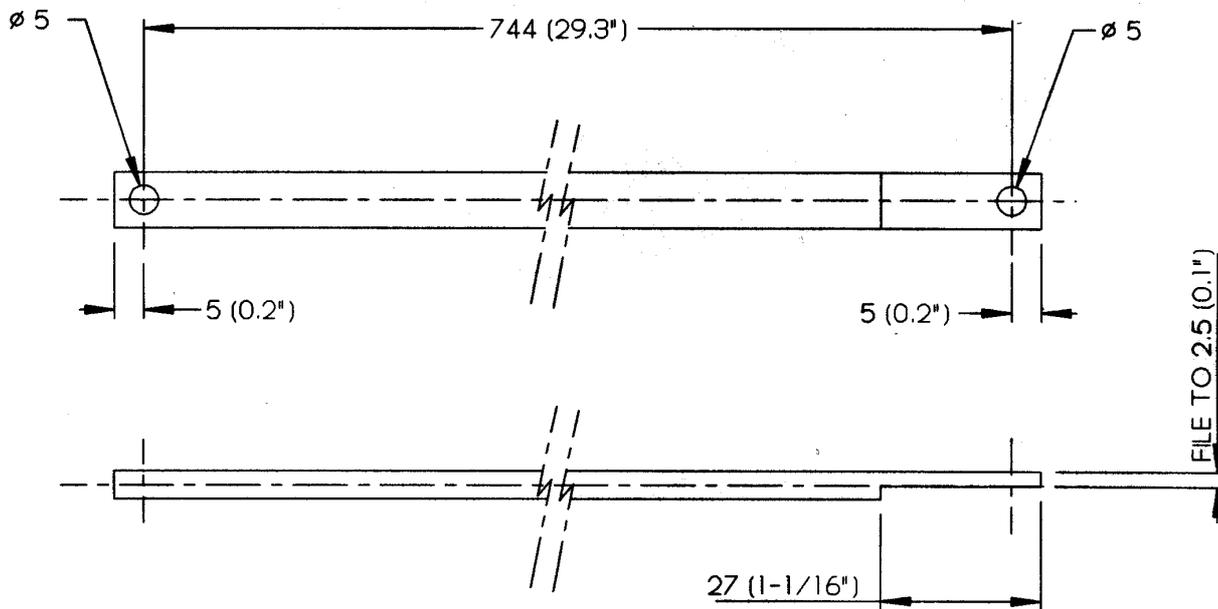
Dimensions in millimetres of rear push rod - 2 required.
